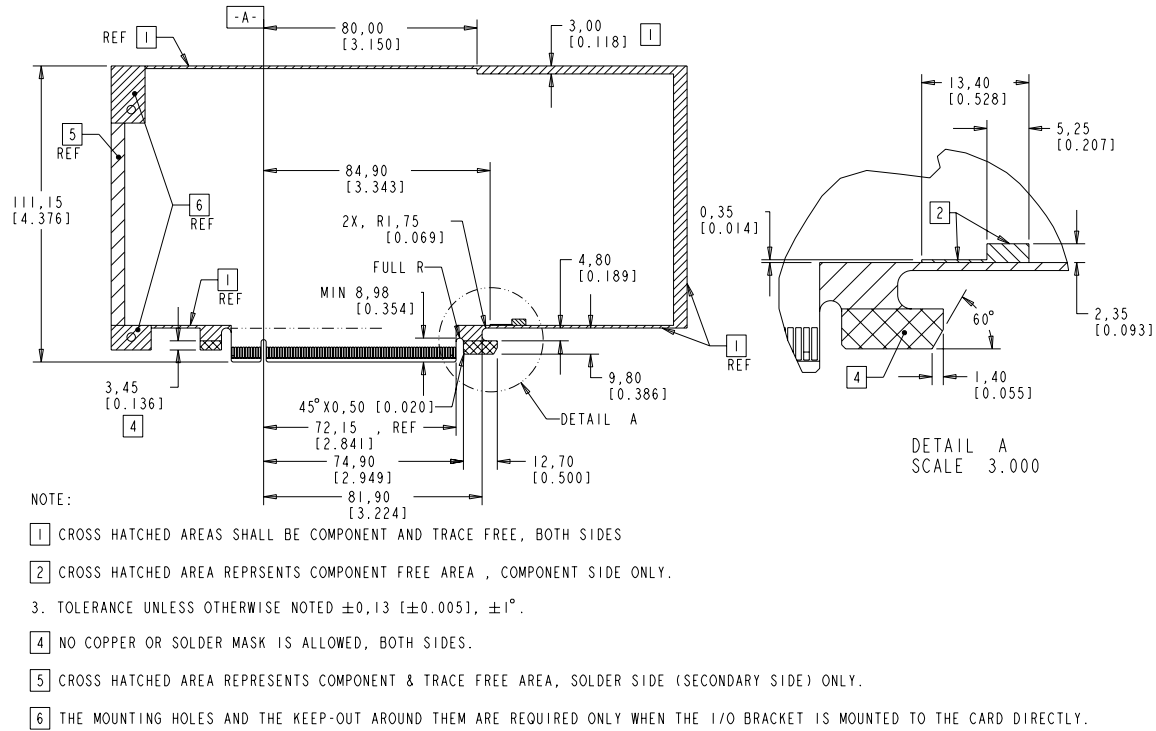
Standard Height PCI Express Add-in Card with the I/O Bracket and Card Retainer
